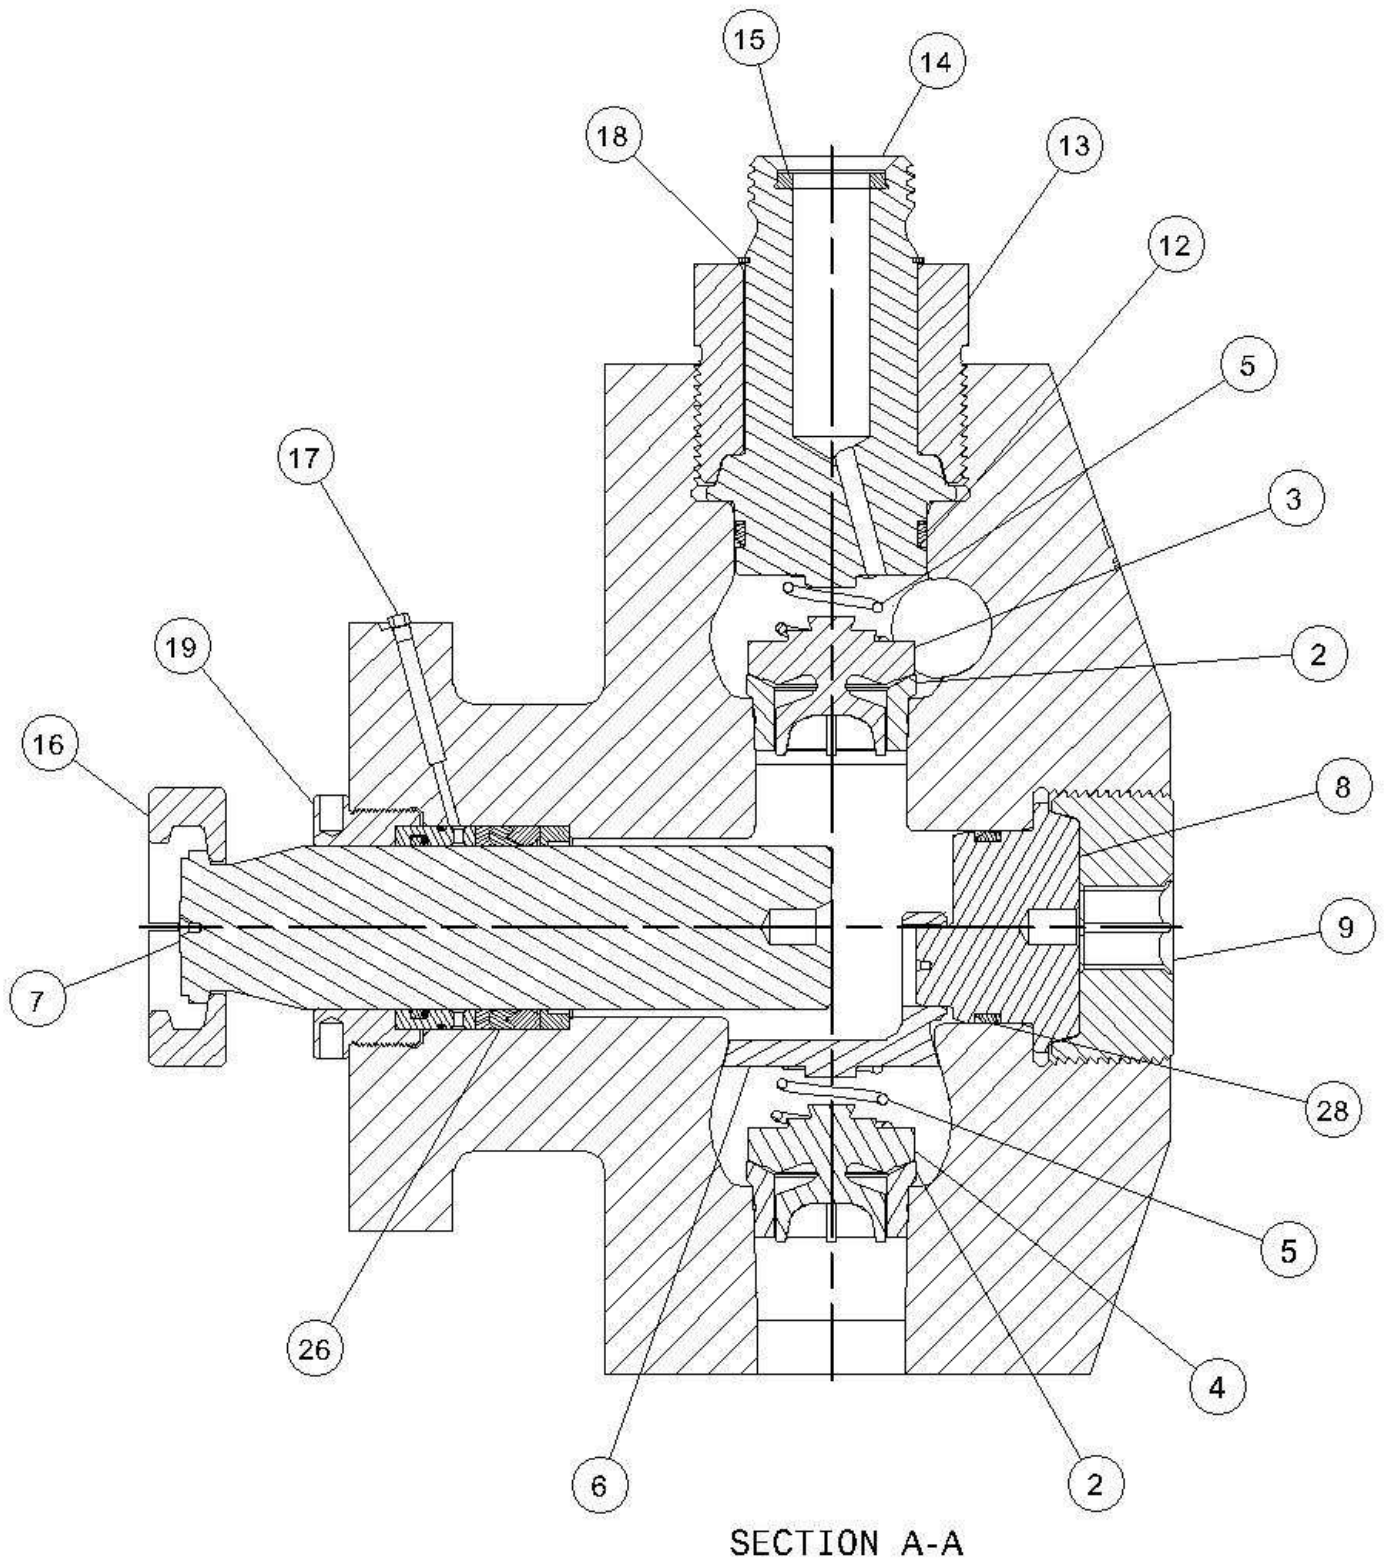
SUPER GWS FLUID CYLINDER SECTION A-A VIEW
